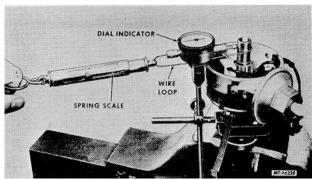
Shaft and Bushing Wear Test (Checking Distributor Shaft Side Play)
